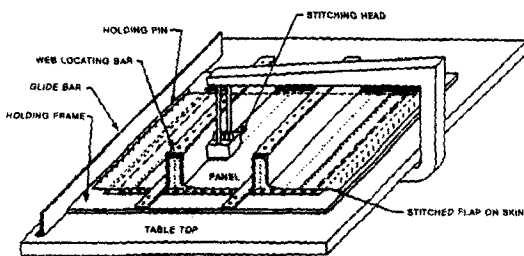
Single-needle sewing machine for the stitching of "T" flange to skin.
